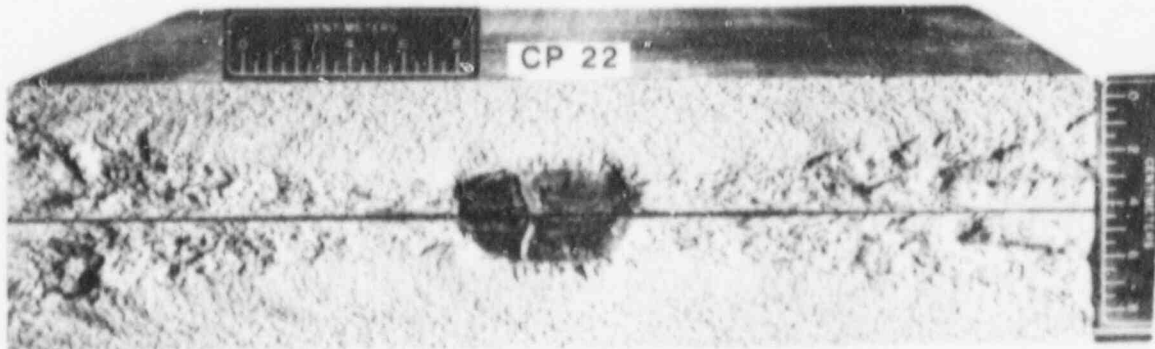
General view of the fracture surface of plate CP-22.
